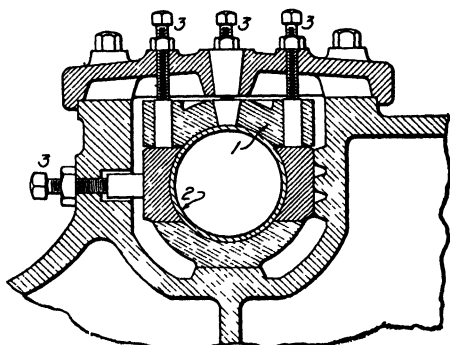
Section of Babbitt Lined, Quarter-Boxed Main Bearing
